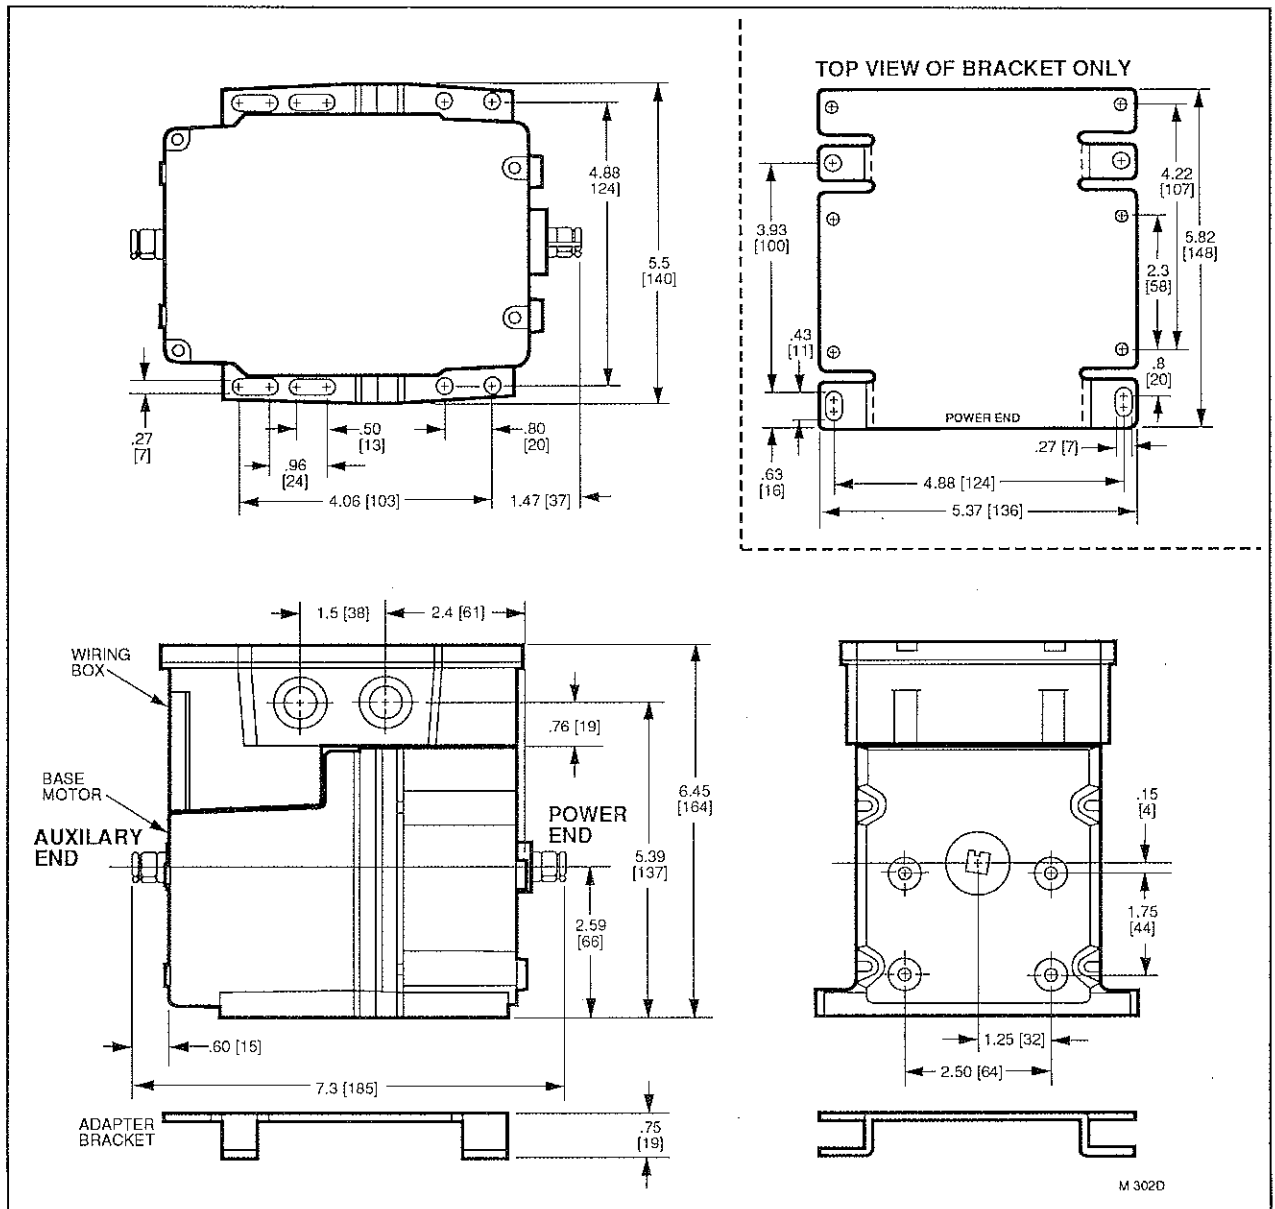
M9184, M9194 MOUNTING DIMENSIONS IN in. [mm IN BRACKETS].
